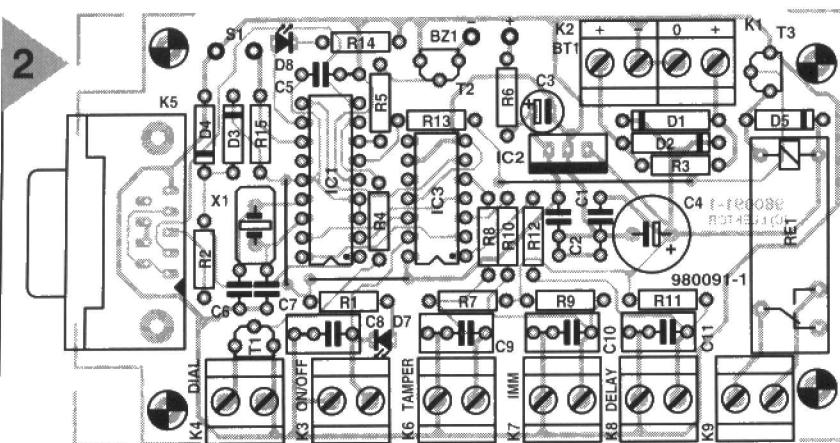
Copper track layout and component mounting plan of the printed circuit board designed for the alarm system.
